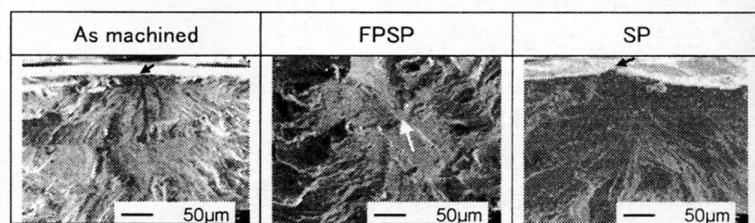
Fatigue fracture surface (1.6 μm machined). Crack initiation sites of each sample are pointed by arrows.
